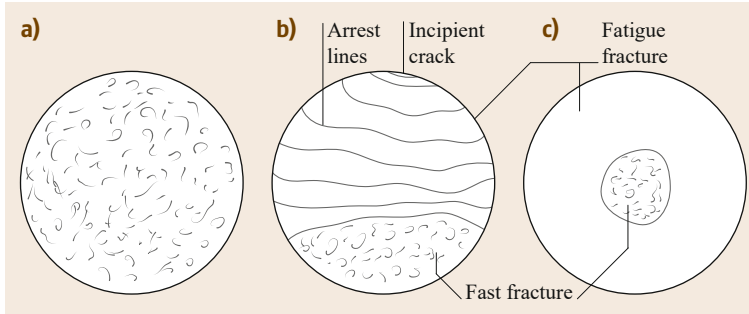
c Fast fracture (a), fatigue fracture under one-sided loading (b), and fatigue fracture under rotating bending load (c)
